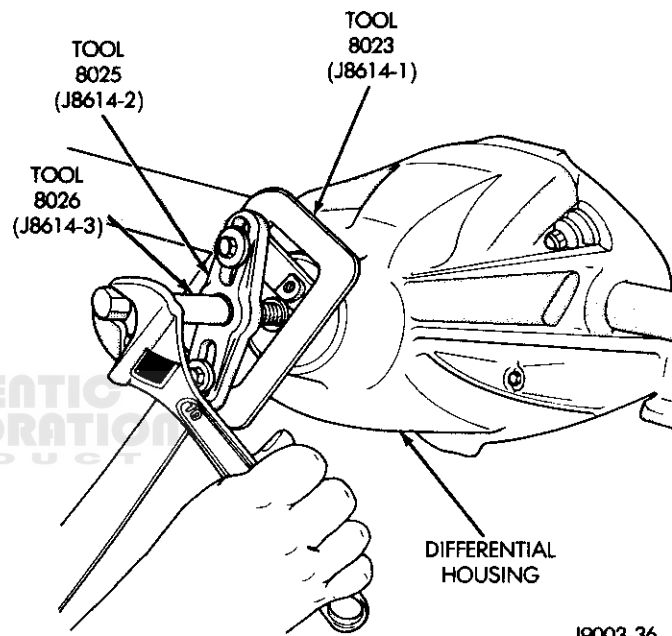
Pinion Gear Shaft (Axle) Yoke Nut Removal
